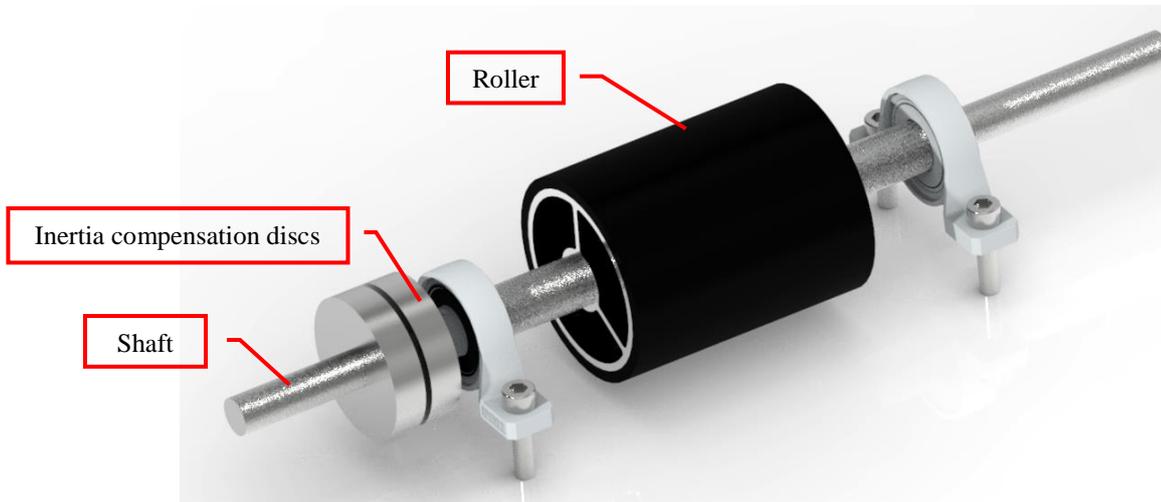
Detail view of components: inertia compensation discs, roller, and shaft.
